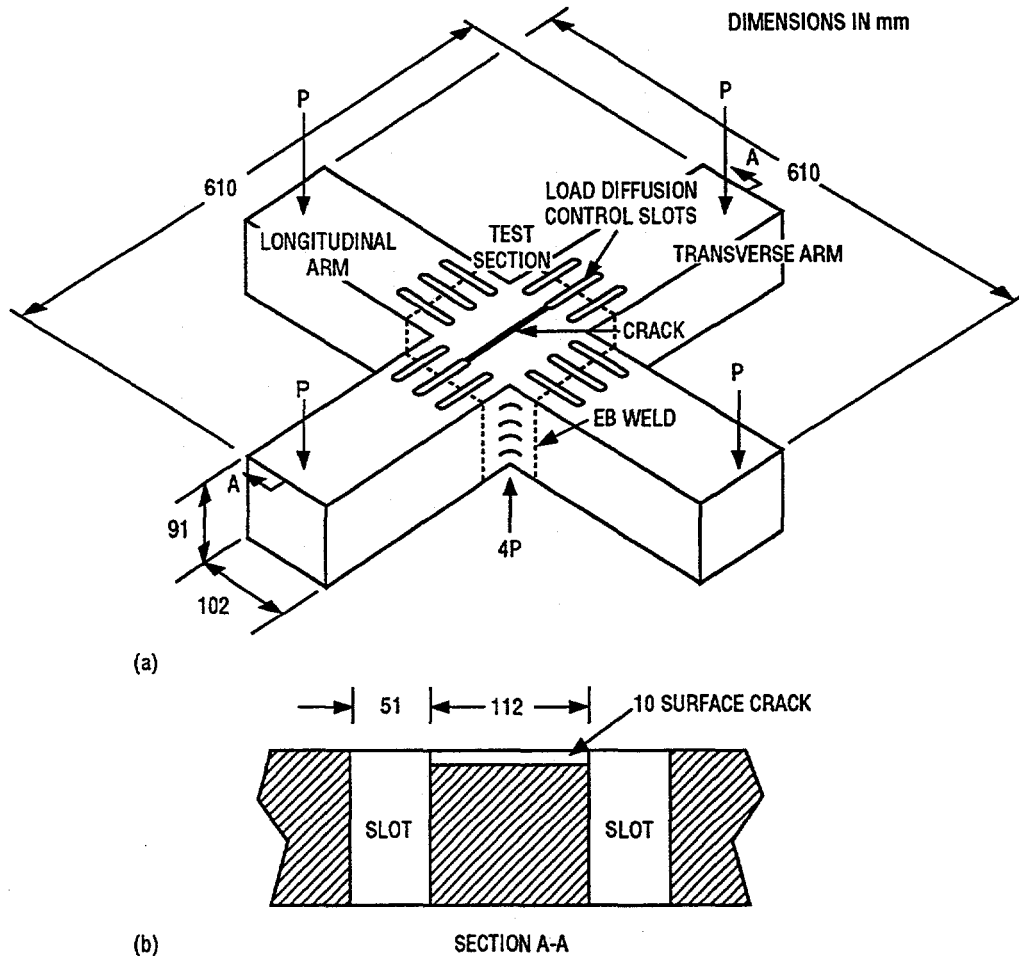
Cruciform bend specimen used in HSST biaxial testing program: (a) dimensions of cruciform specimen and (b) detail of crack plane
